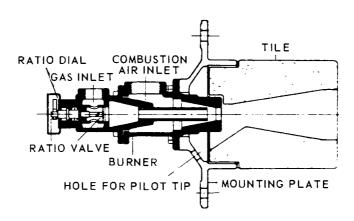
Cross-sectional view of forced air, premix, multiple-port burner.
